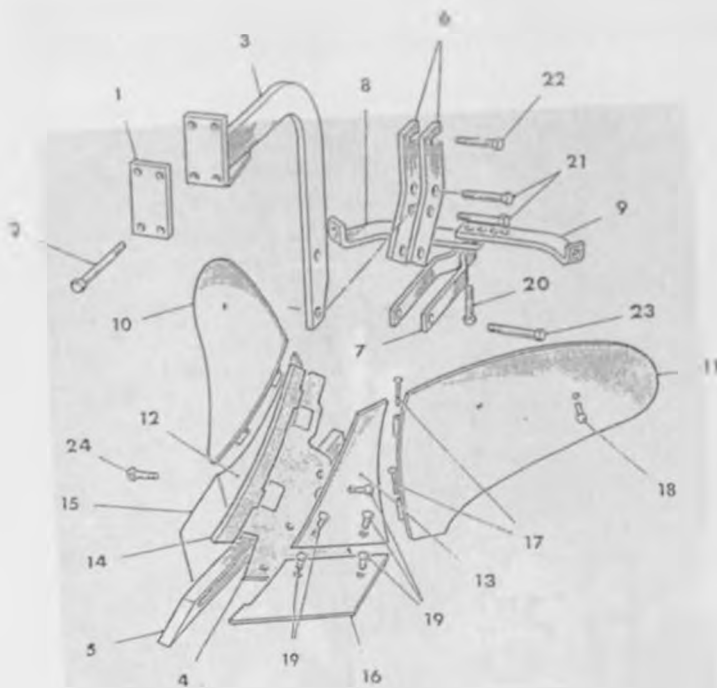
Exploded view of the components of an original mouldboard furrower design
